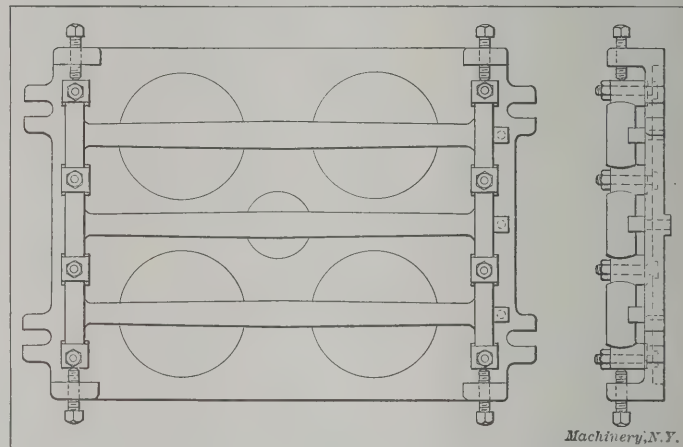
Design of Fixture for Connecting-rods, which proved Objectionable
